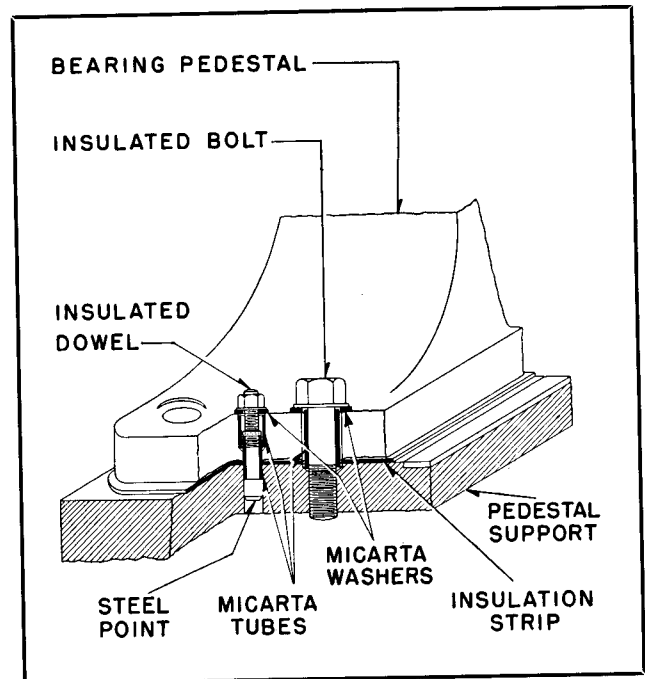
Method of Insulating Bearing Pedestal from Bedplate
